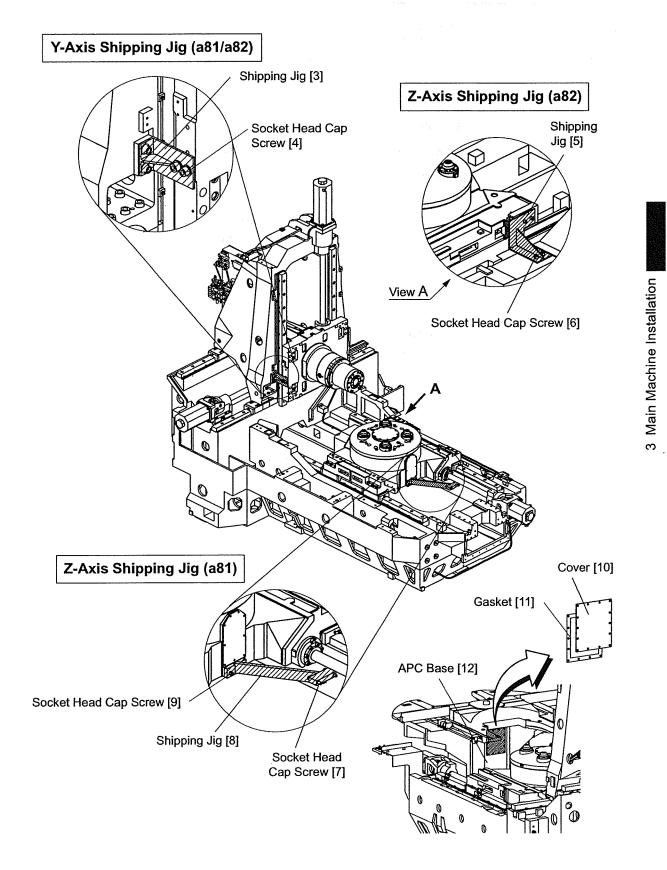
Y/Z-Axis Shipping Jig Removal
